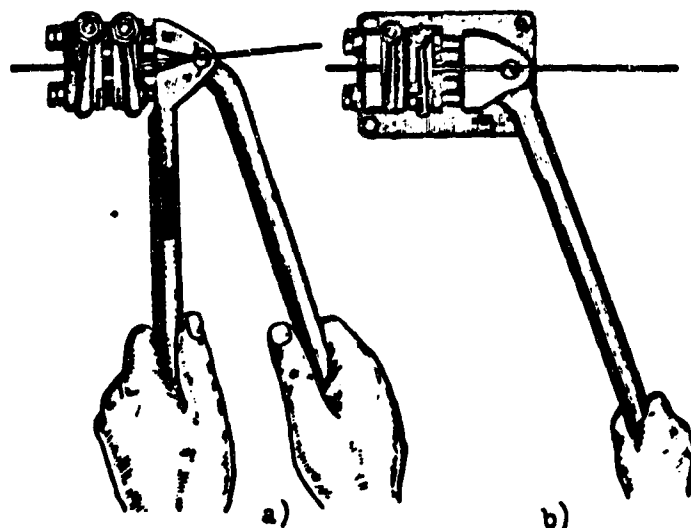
Overall view of tongs for cold welding of wires: a) hand type KS-6, b) table type SNS-2.
